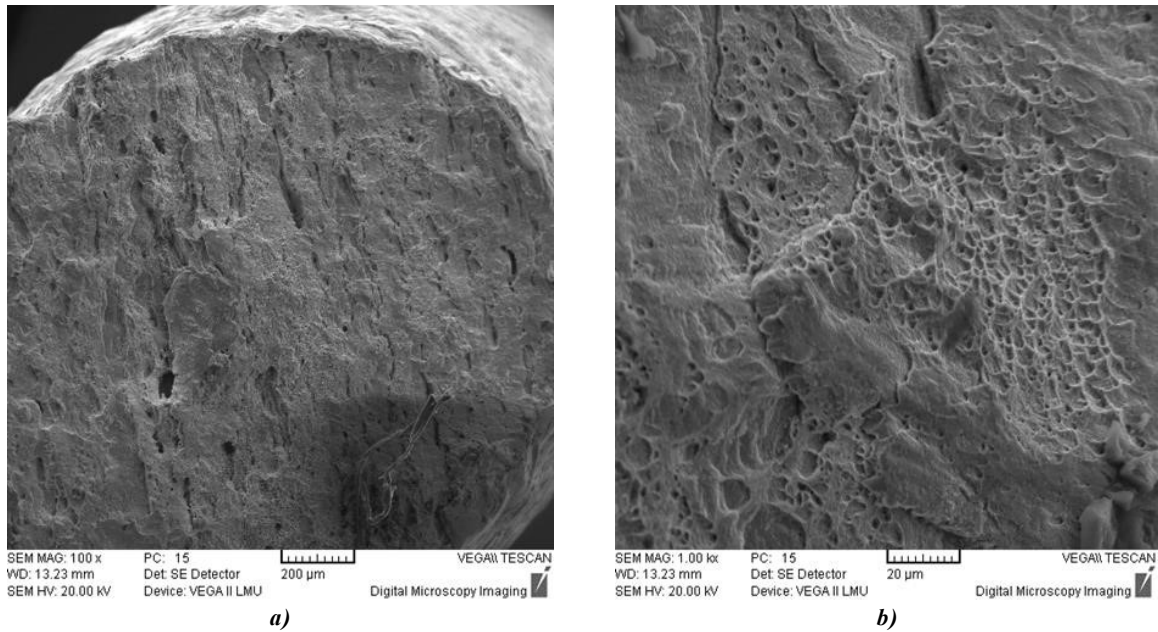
SEM aspects of 316L cylindrical specimen fracture surfaces tested at 450 °C: a) x100 magnification; b) x1000 magnification.
